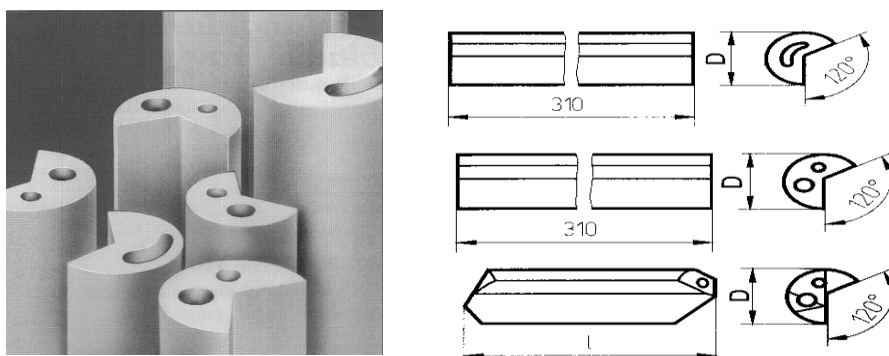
Semi-products for drill heads for deep holes with straight openings and different shapes for the cooling - lubrication liquid
